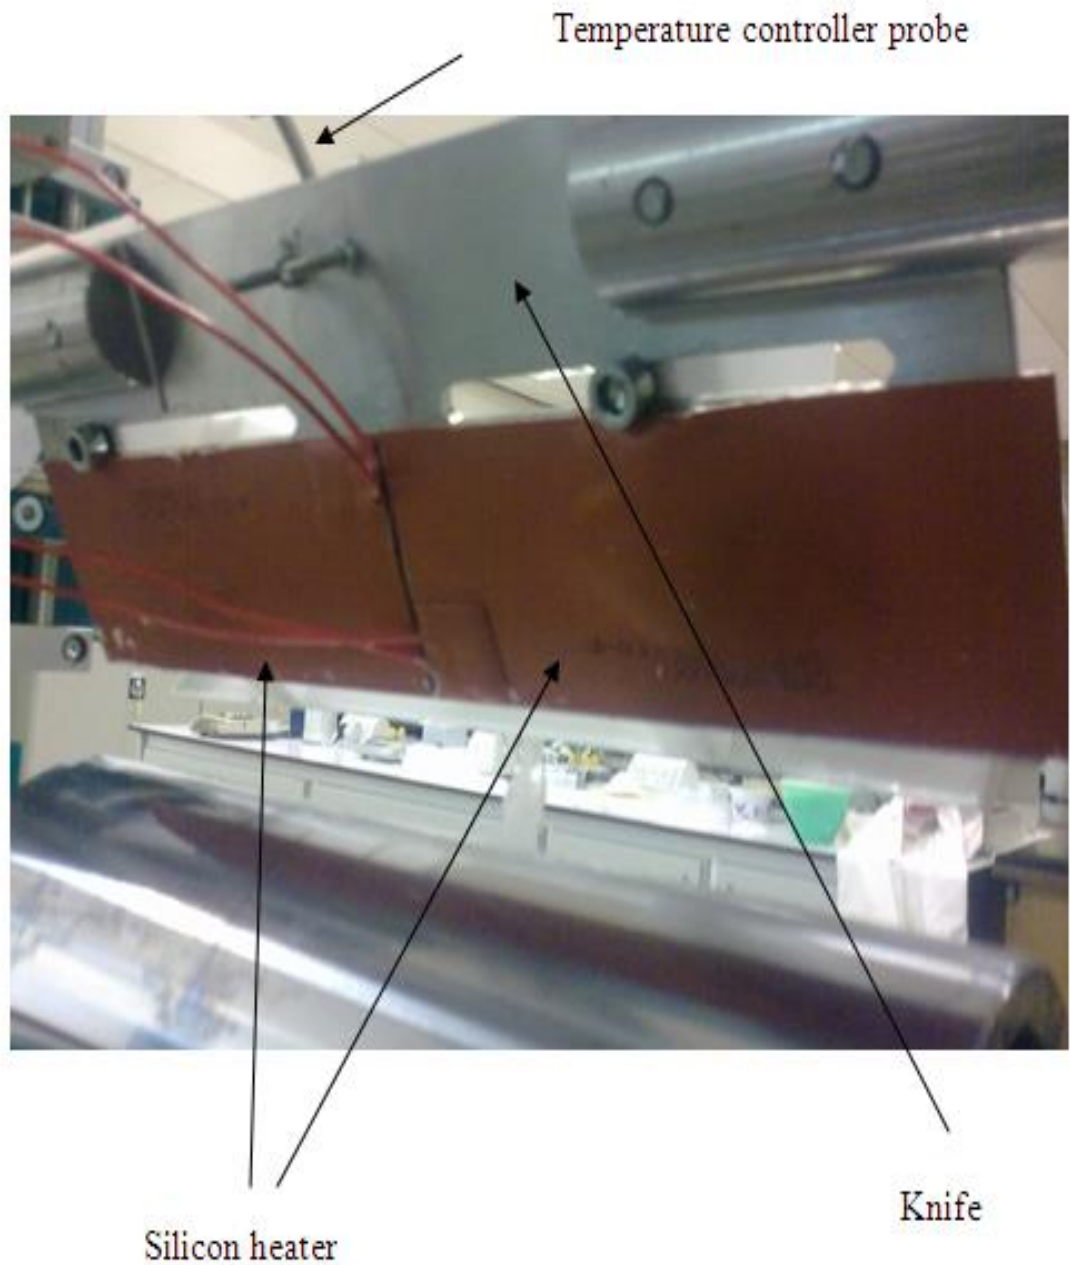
Knife Assembly of Coatema Basecoater BC 06
